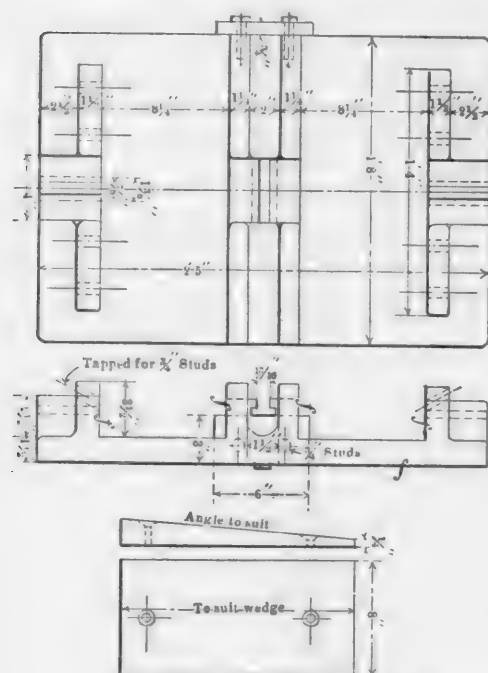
JIG USED FOR MILLING SHOES AND WEDGES AND CROSS-HEAD SHOES.
